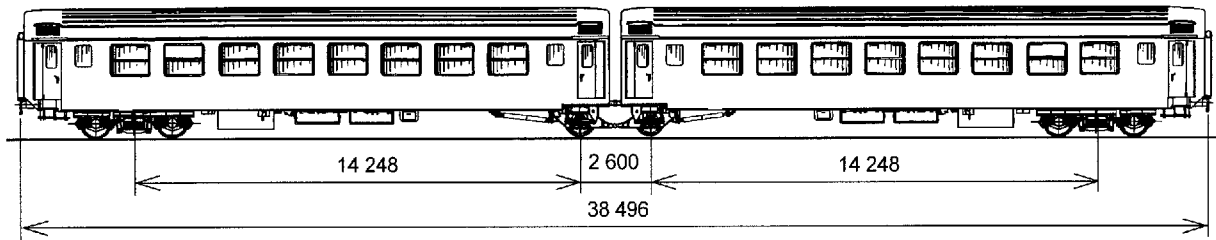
Testing vehicle composed of two rebuilt short coupled passenger train coaches. The prototype of the coupled single-axle running gear FEBAs is assembled in the middle of the test vehicle
